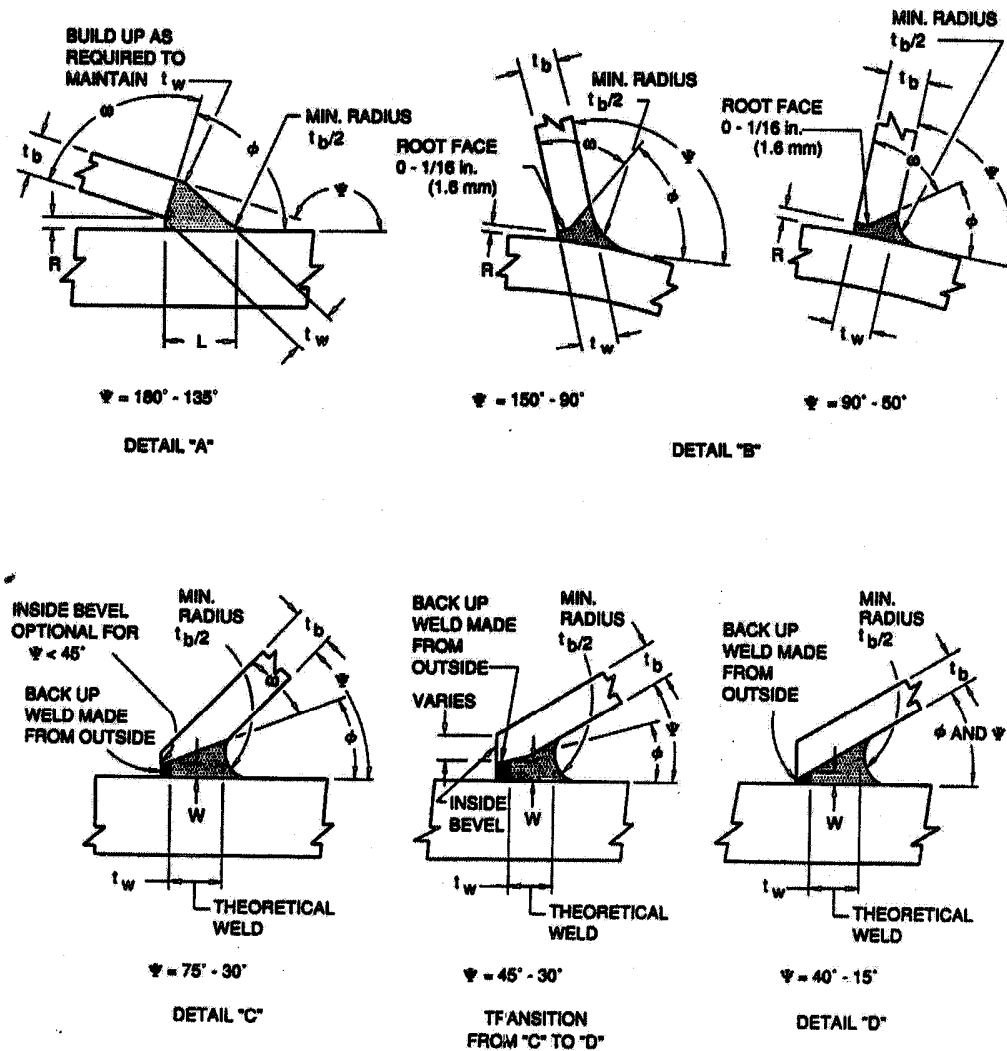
AWS welding details for complete joint penetration in tubular T-, Y-, K-connections [9]
